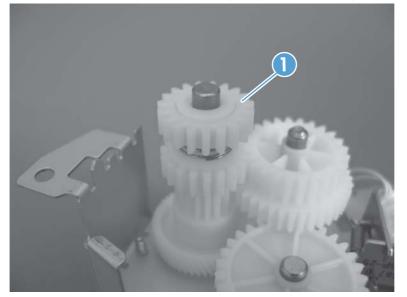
Remove the cassette pickup drive assembly (10 of 10)
